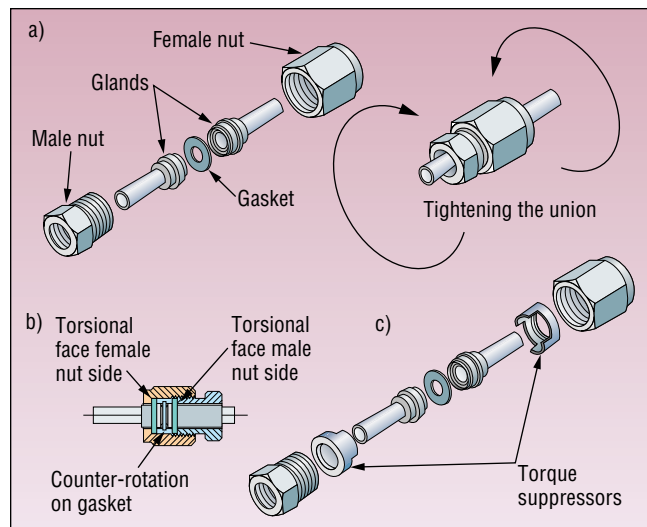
a) Standard metal face seal fitting; b) load transmission diagram; c) modified face seal fitting.
